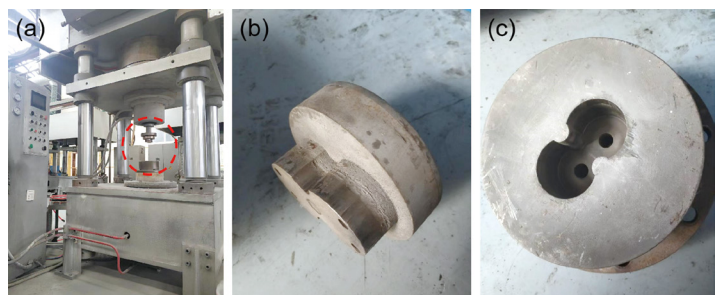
Forming equipment and molds: (a) vertical extruder; (b) upper mold; (c) lower mold
